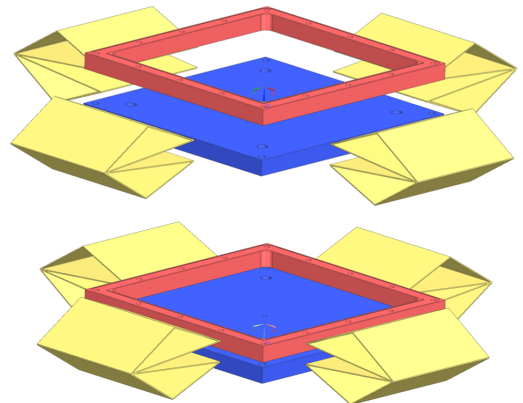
Dimensional CAD model of the CORS including flexure base, flexure mechanism, and platform
